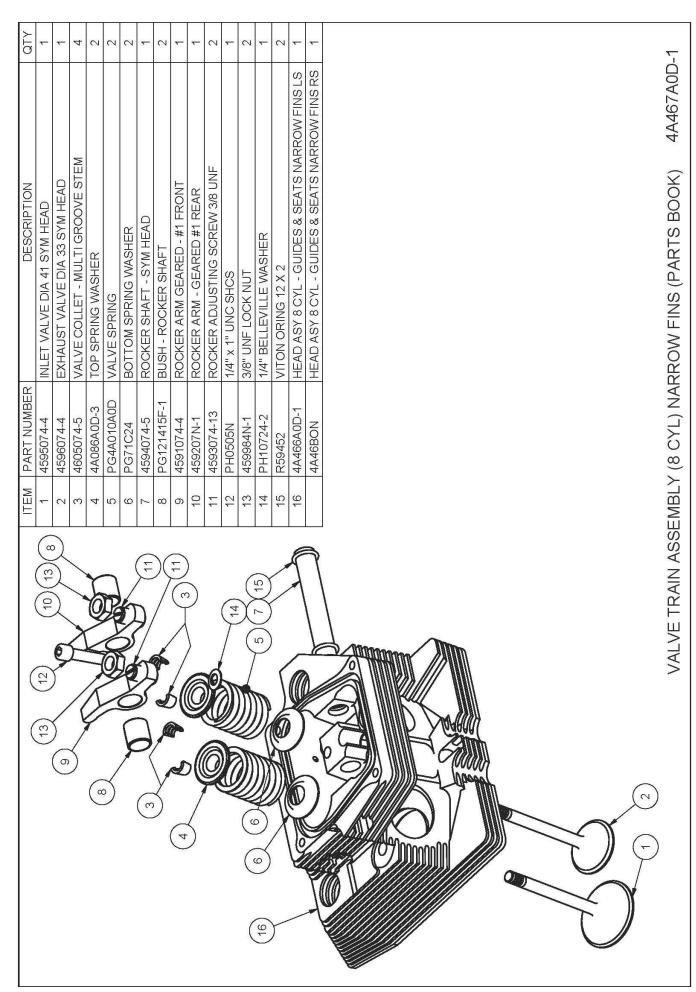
Valve Train Assembly (Narrow Fins) S/N 34 on
